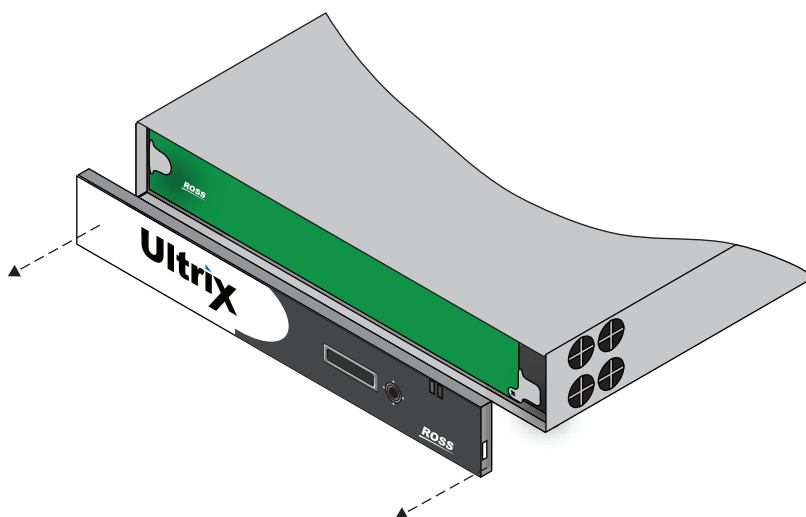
ULTRIX-FR2-NS Front Panel — Removing the Door
